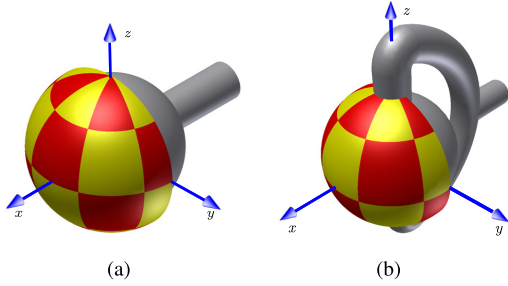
Mechanical rotor designs for (a) circular coil array and (b) elongated coil array.
